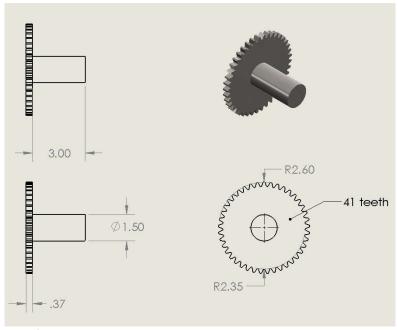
Drawing of Gear and Gear Shaft (Dimensioned in Inches)
